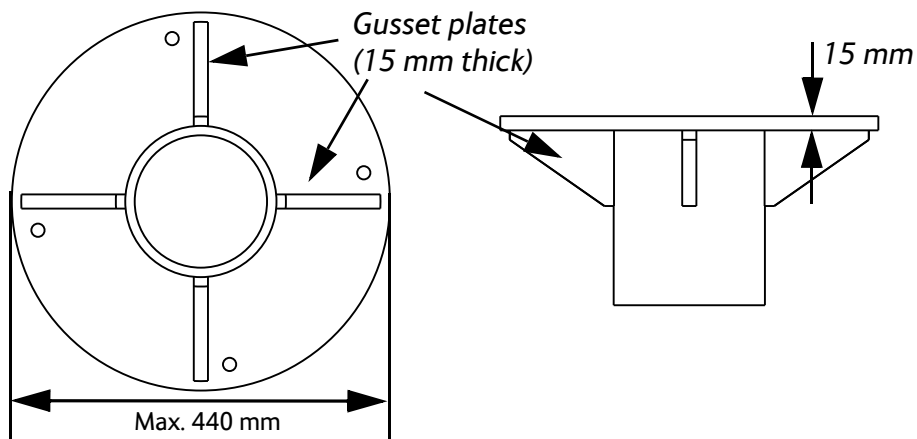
SAILOR 900: ADU mast flange, top and side view
